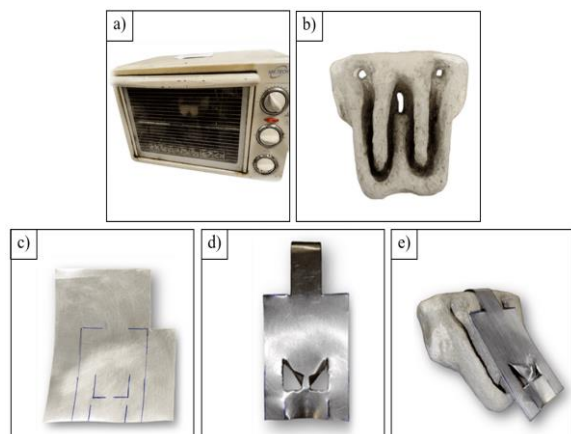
a) ceramic piece in the oven; b) front roughing; c) drawing for aluminum sheet cutting; d) cut aluminum sheet, and e) final result.
